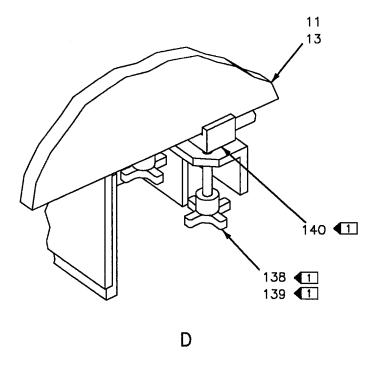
Installation of Drill Plates into Maintenance Fixture (Sheet 2)
